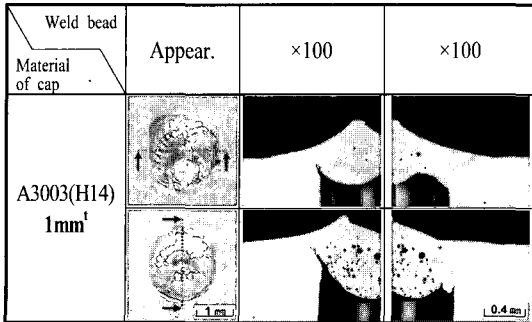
Welding of electrolyte injection hole by A4047 wire
